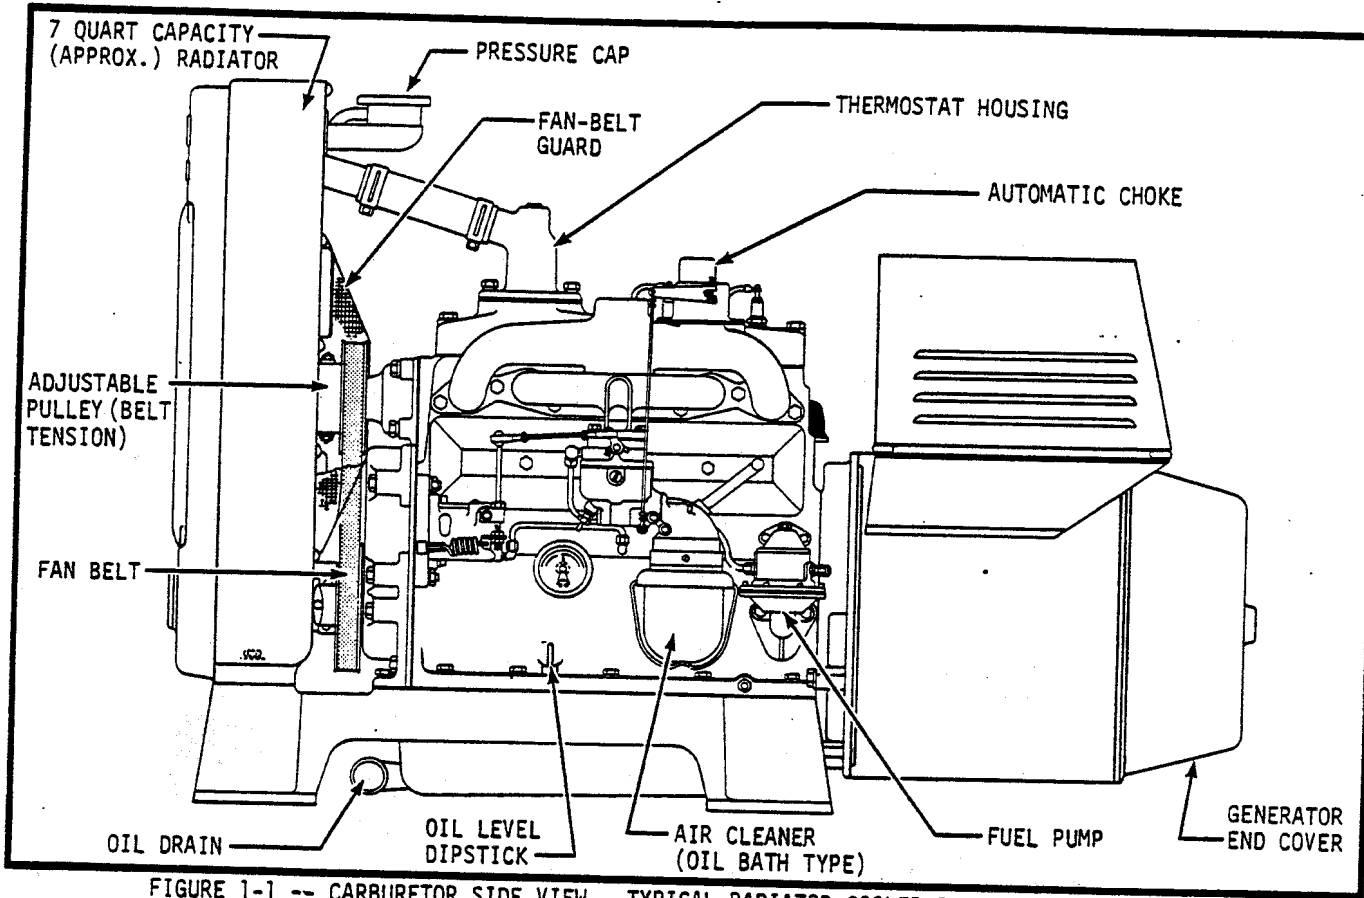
CARBURETOR SIDE VIEW - TYPICAL RADIATOR COOLED PLANT WITH L600 ENGINE
